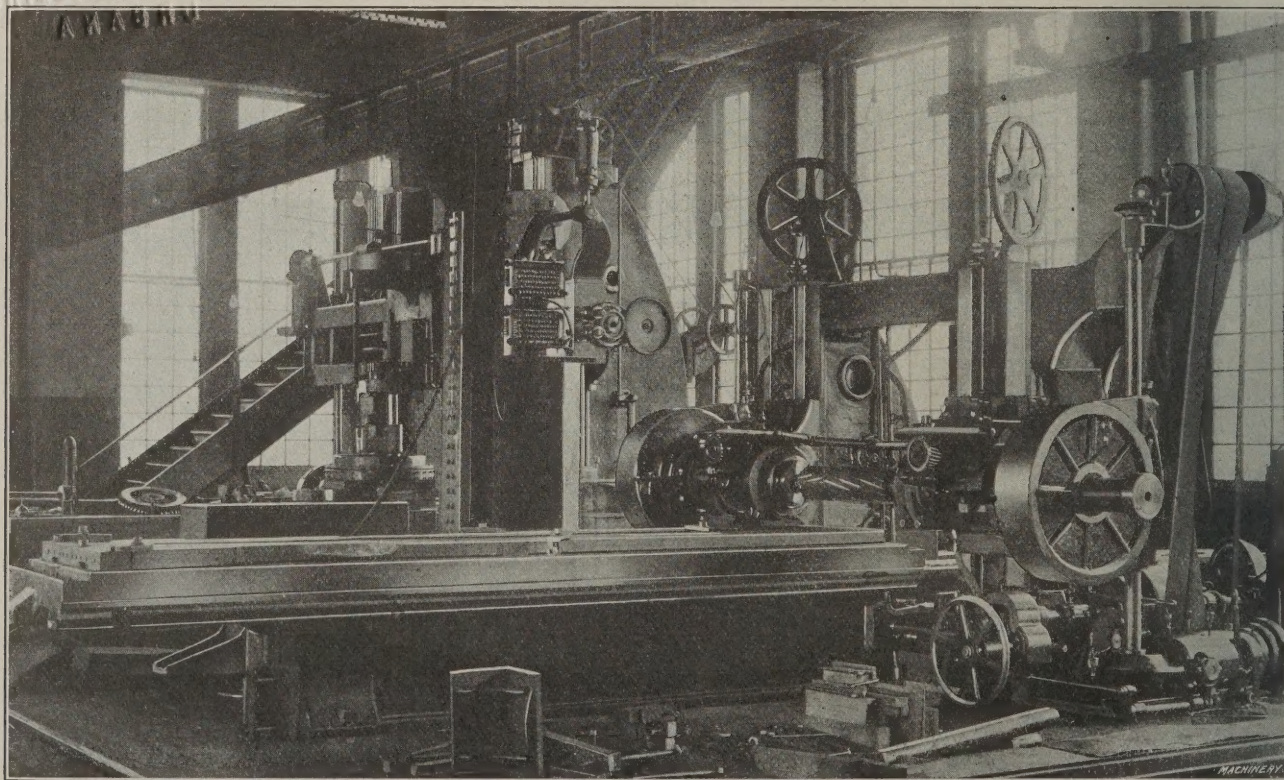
Horizontal Milling Machine on which Trailer Frames are milled
